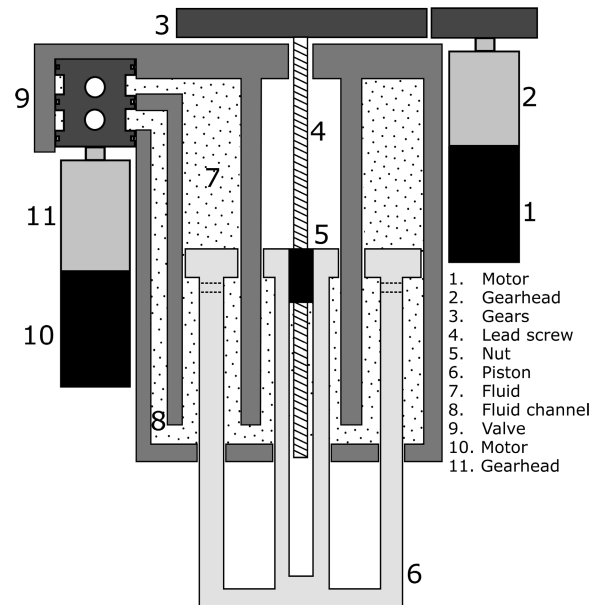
Constant volume power asymmetric actuator schematic. Components are labeled within the figure. The actuator includes an inner cylinder, outer cylinder, inner piston, outer piston, fluid return path (fluid channel), damping valve, a motor and gearhead for driving the valve, lead screw, lead nut, gears, and a motor and gearhead for driving the electromechanical actuator. Hydraulic fluid is contained in the regions with small dots.
